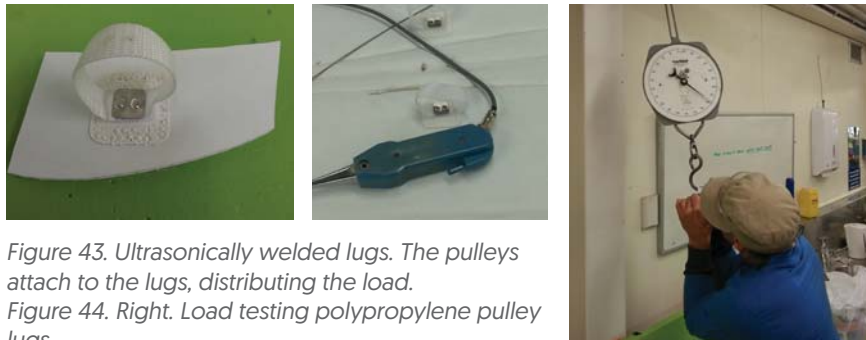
Ultrasonically welded lugs. The pulleys attach to the lugs, distributing the load.
